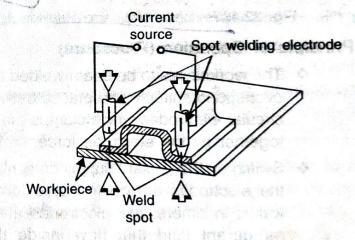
(b). Indirect Spot Weld.
